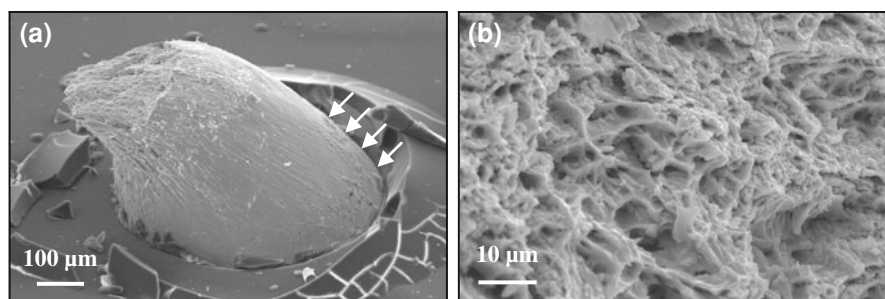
SE detector images of a SAC 405 solder joint that was tested in impact at room temperature. a The solder joint failed in a ductile manner, showing appreciable plastic deformation and necking. b The fracture surface of the solder joint is characterised by numerous dimples related to the presence of IMCs in the solder. Data from imec
